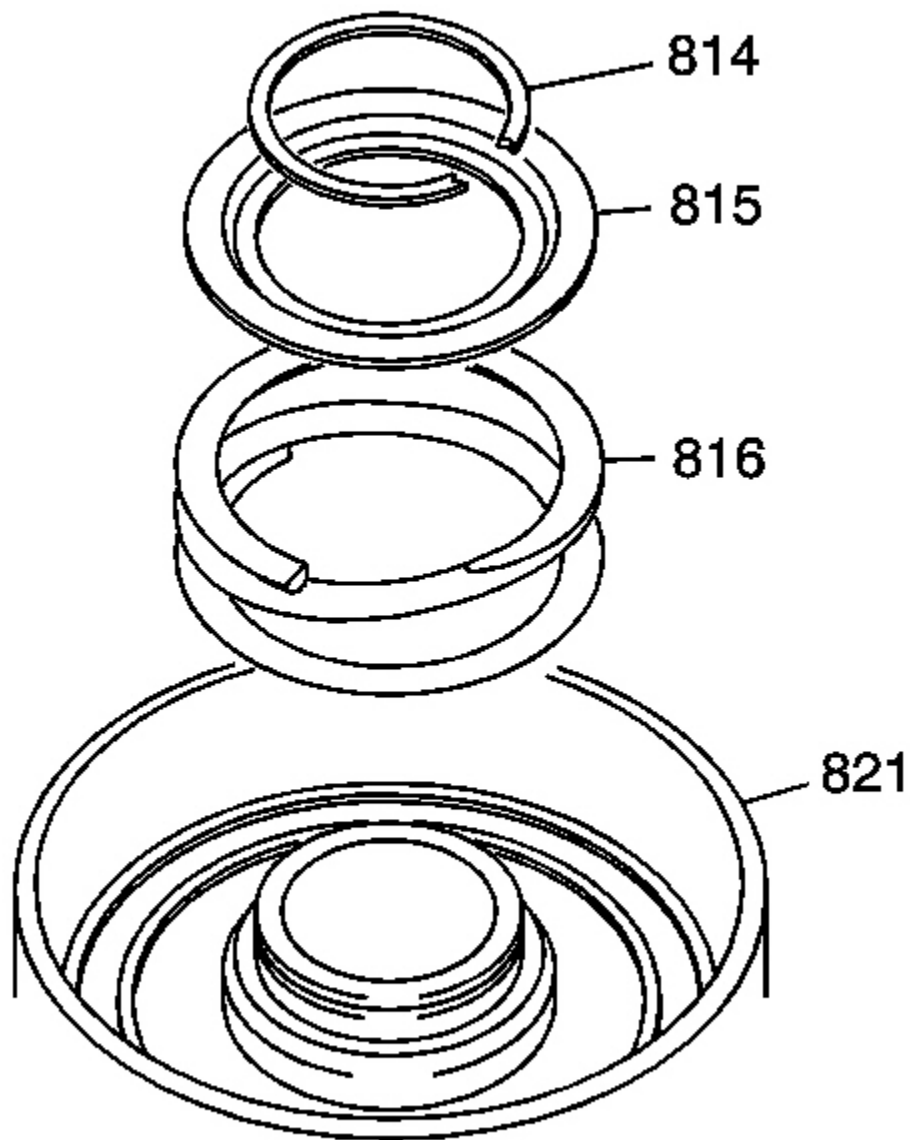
3rd Clutch Piston Spring Cap, Return Spring & Retaining Ring
